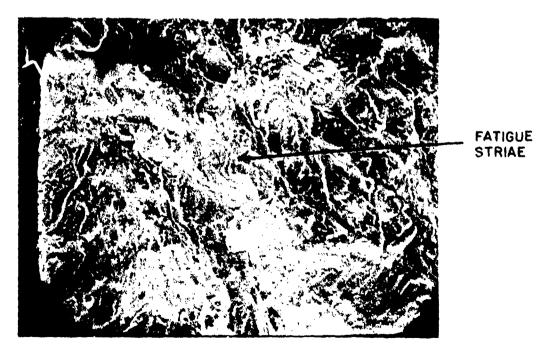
Transgranular fracture in an A-516 fatigue specimen, 650x.
